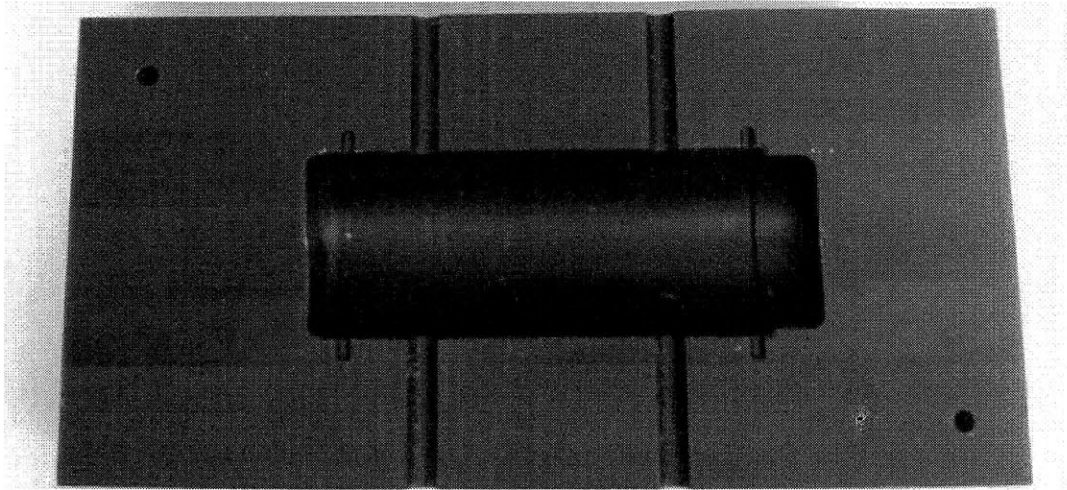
CNC machined mold for flexible body made from machinable wax.
